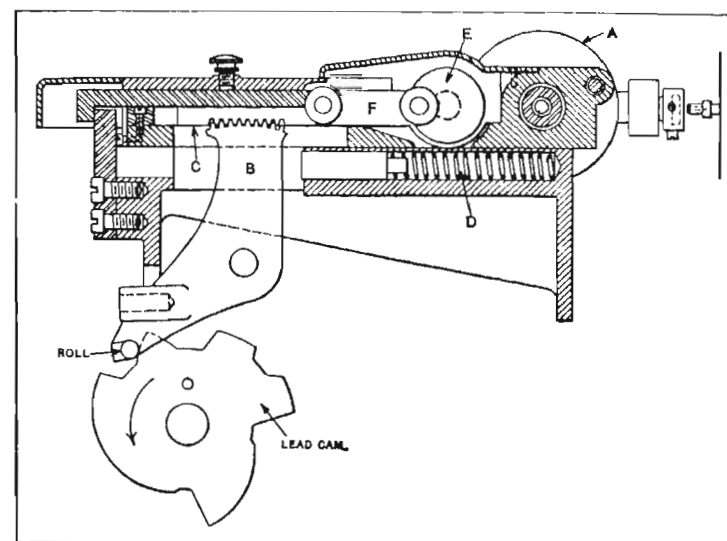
Independent Quick-return Movement for Screw Machine Turret-slide
